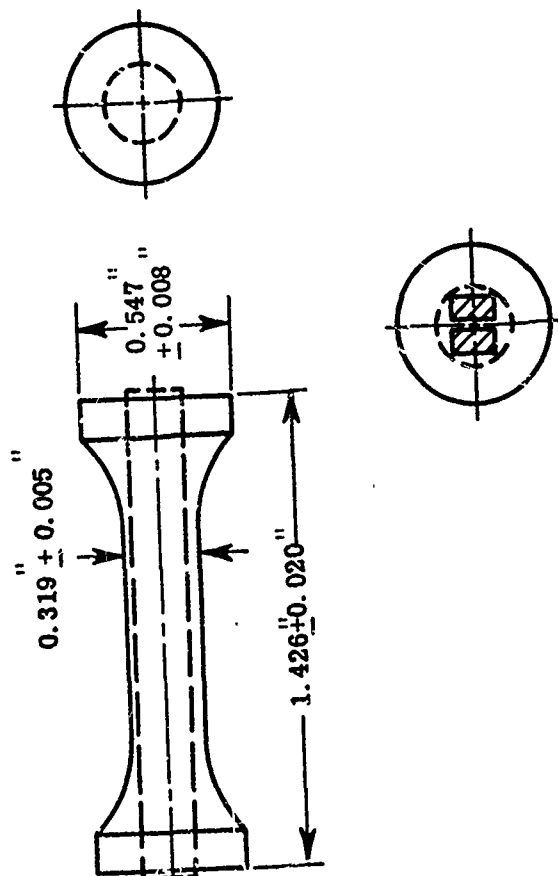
Configuration of Specimen Elank 1831-A-6 as received from Coors and Cutting Plan for Removing Phase I Macro Tensile and Macro Flexural Specimens
